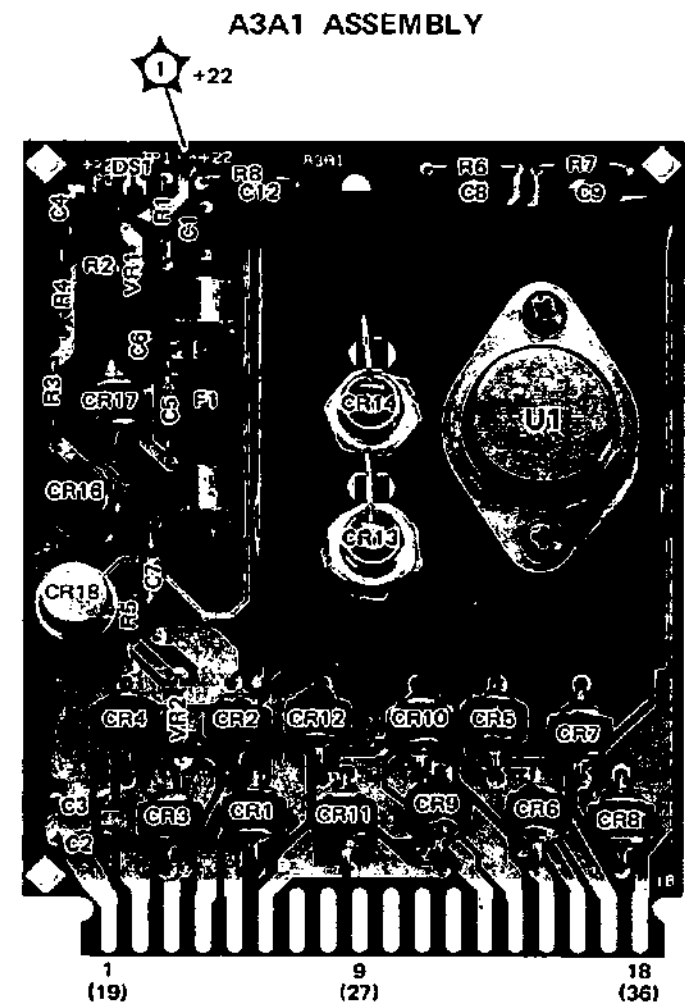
A3A1 Rectifier Assembly Component and Test Point Locations
